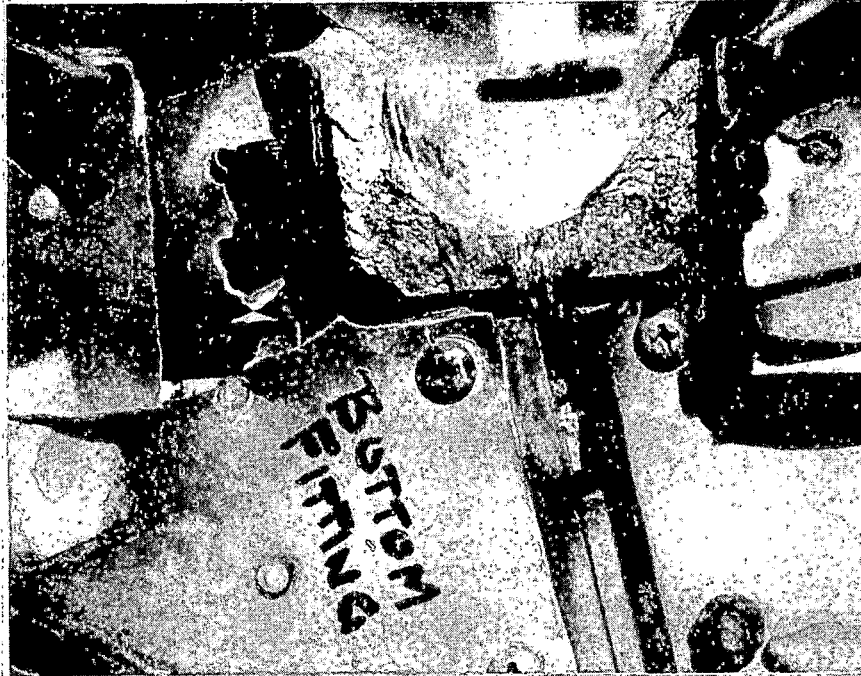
IN-SITU VIEW OF THE OUTBOARD REMNANT OF THE FAILED LOWER FORWARD OUTBOARD WING ATTACHMENT FITTING STILL IN THE SEPARATED WING PANEL.
